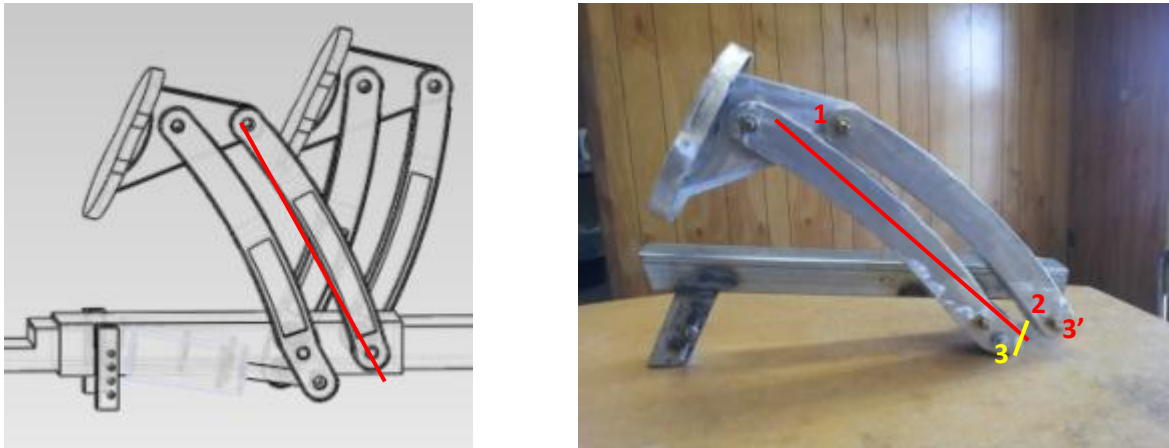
3-D CAD model displays three rotational joints linearly aligned shown on the left. In the first prototype, shown on the right, joint 3 (shown in yellow) was offset from the line connecting joints 1 and 2. This design proved problematic because the spring moved through the over-died-center. The problem was corrected by moving the 3rd rotational point in line with joints 1 and 2. This is shown in red.
